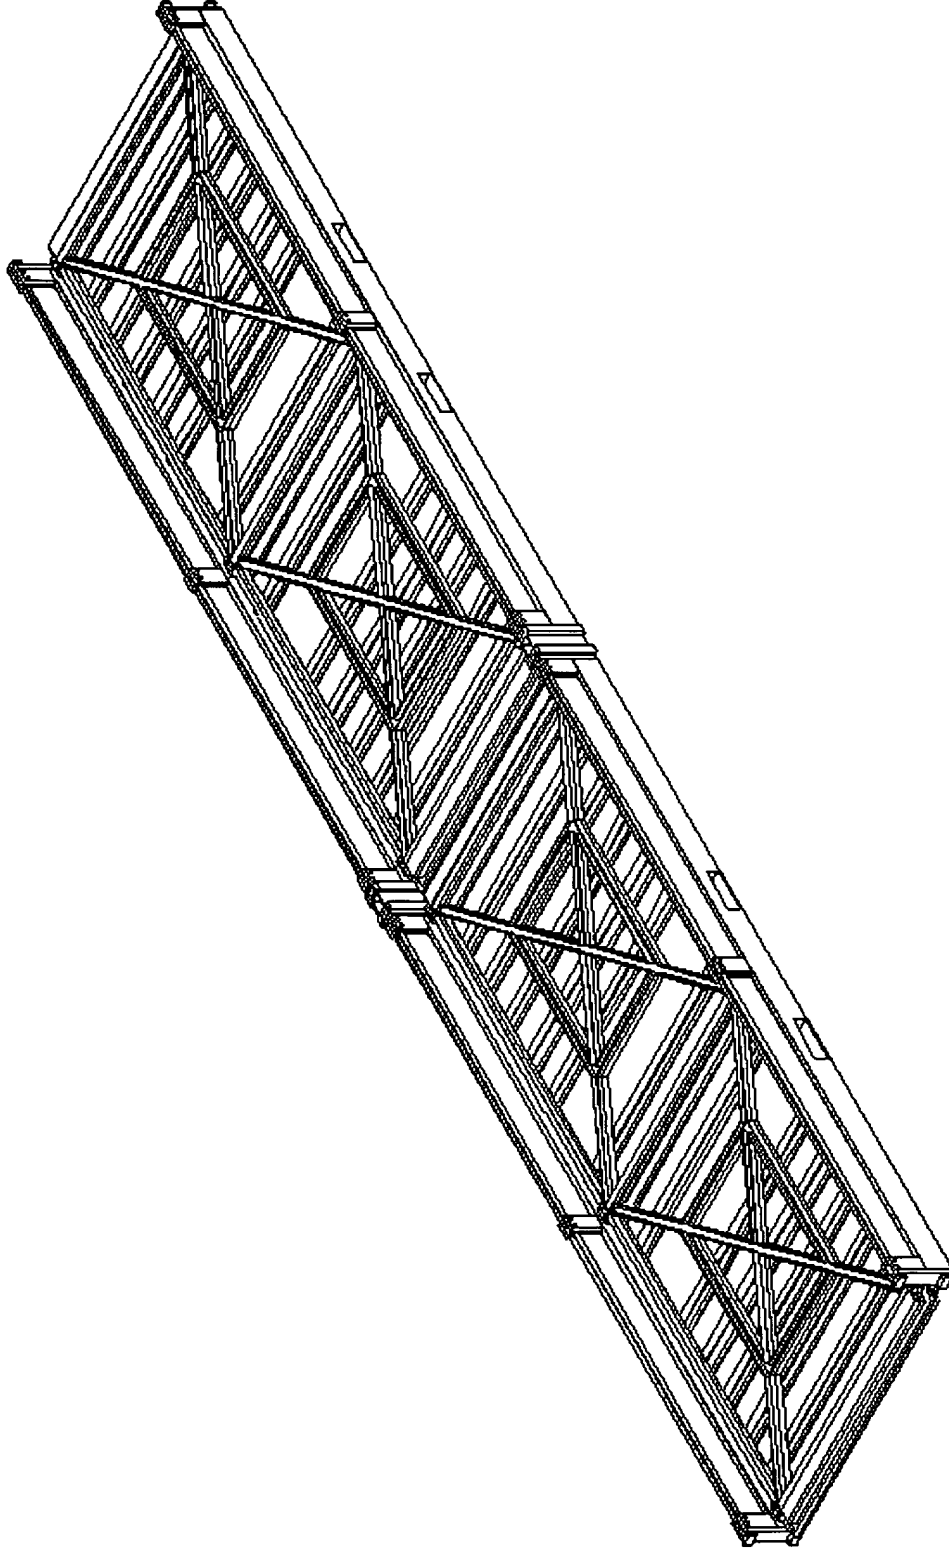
D: Isometric view of connected floor frames that contains two front frames and two back frames (20 foot high cube collapsible cargo container)
